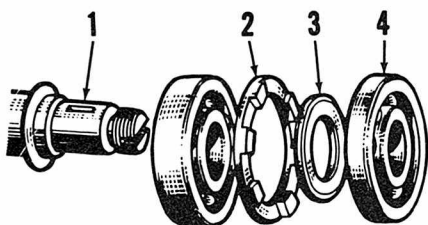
Right crankshaft spacer (2) should be installed as shown with lugs toward bearing (4).
